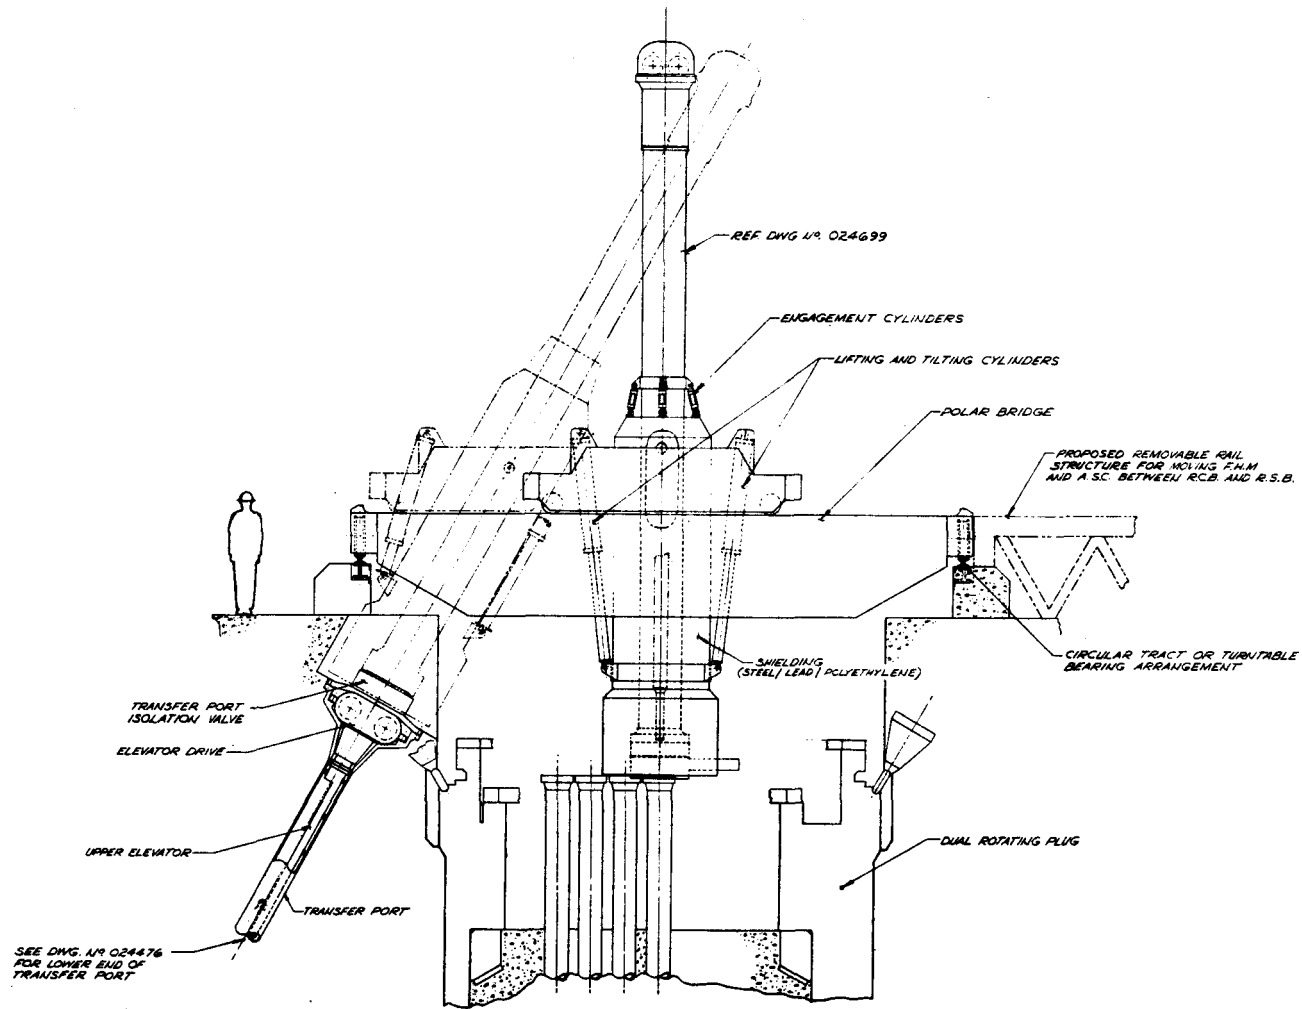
Fuel handling machine installation for rotating plug concept F
